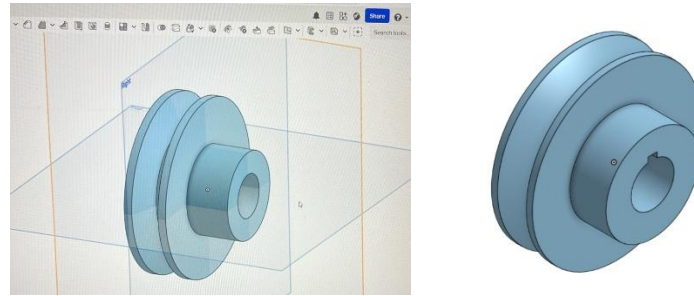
Three-Dimensional CAD Model of the Pulley Developed Using Onshape
